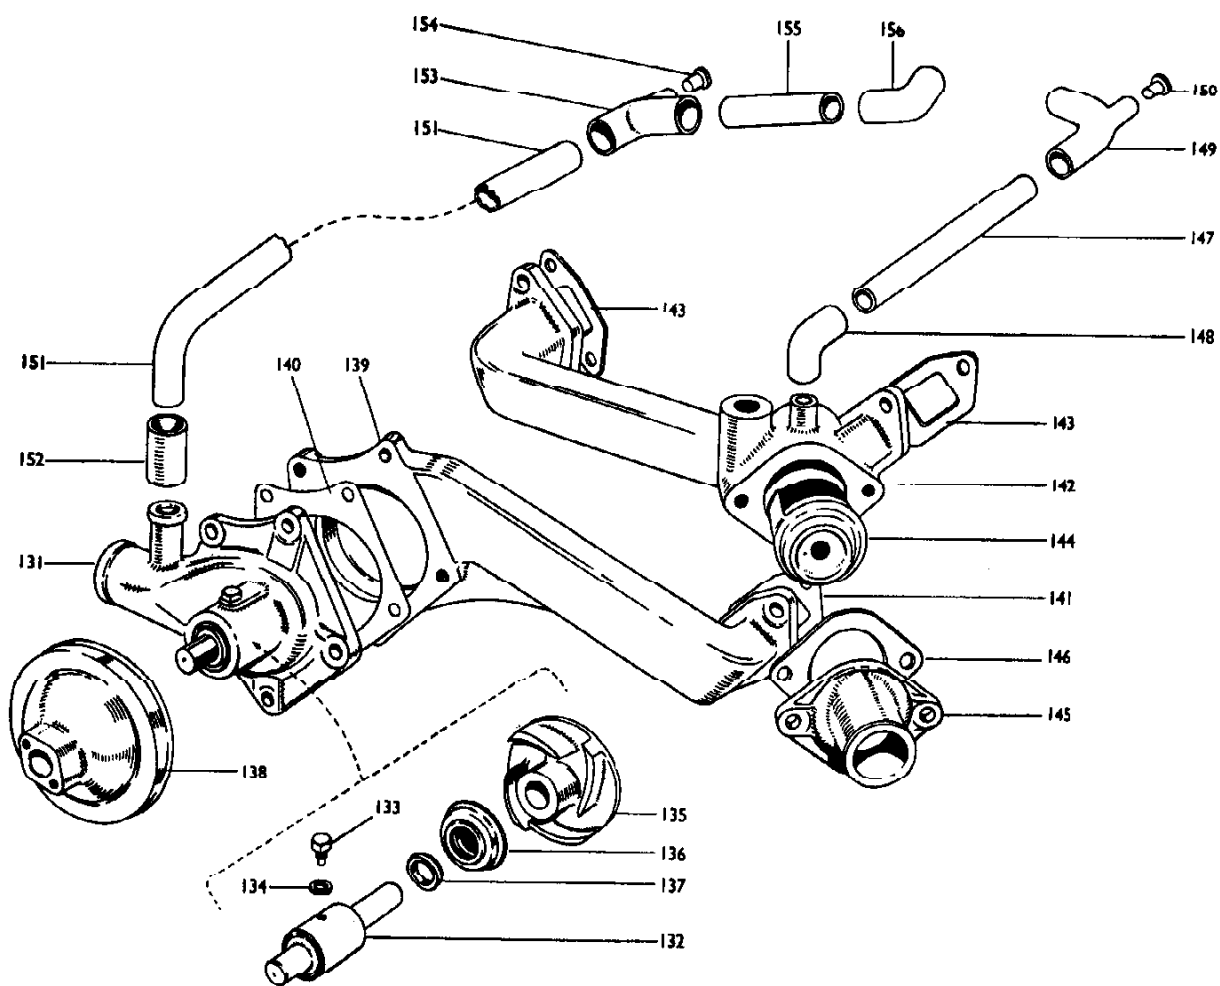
Exploded View of Connecting Pipes, Coolant Pump and Thermostat Unit.
